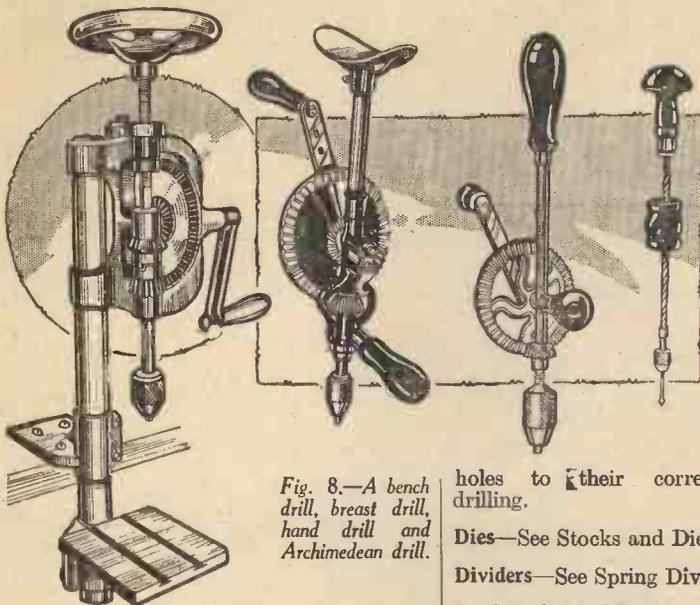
A bench drill, breast drill, hand drill and Archimedean drill.
